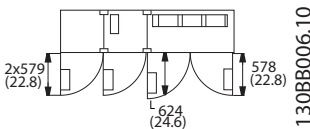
Space in front of IP21/IP54 enclosure type, frame size F4
